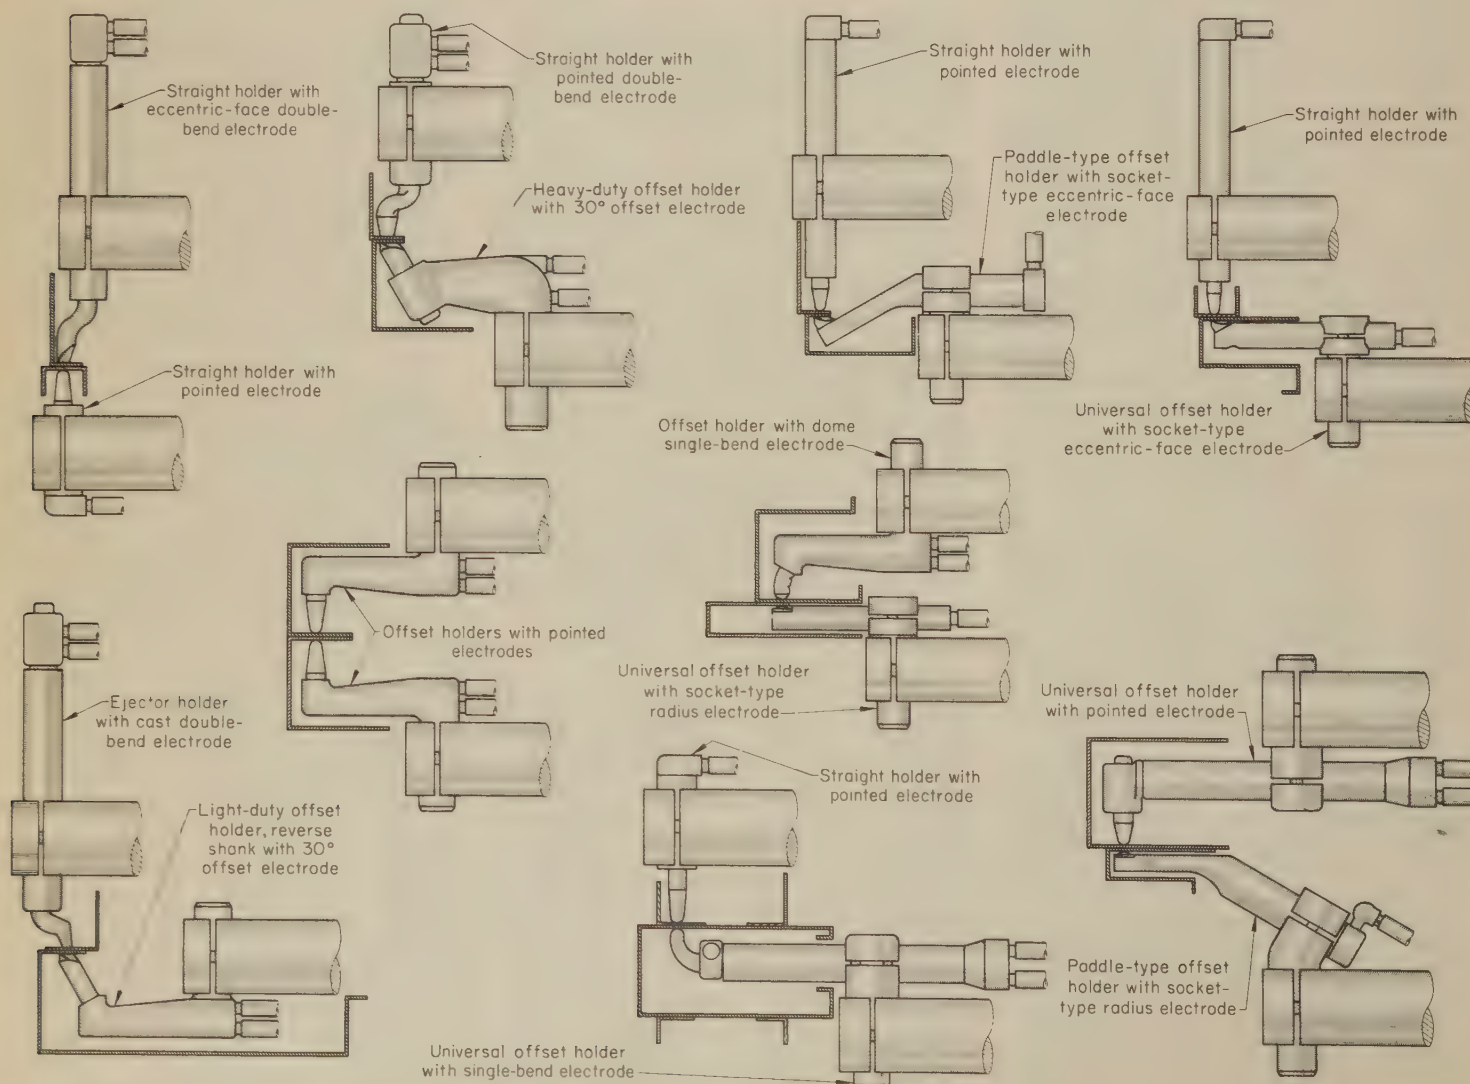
Combinations of standard holders, adapters and electrodes for resistance spot welding with various workpiece configurations
